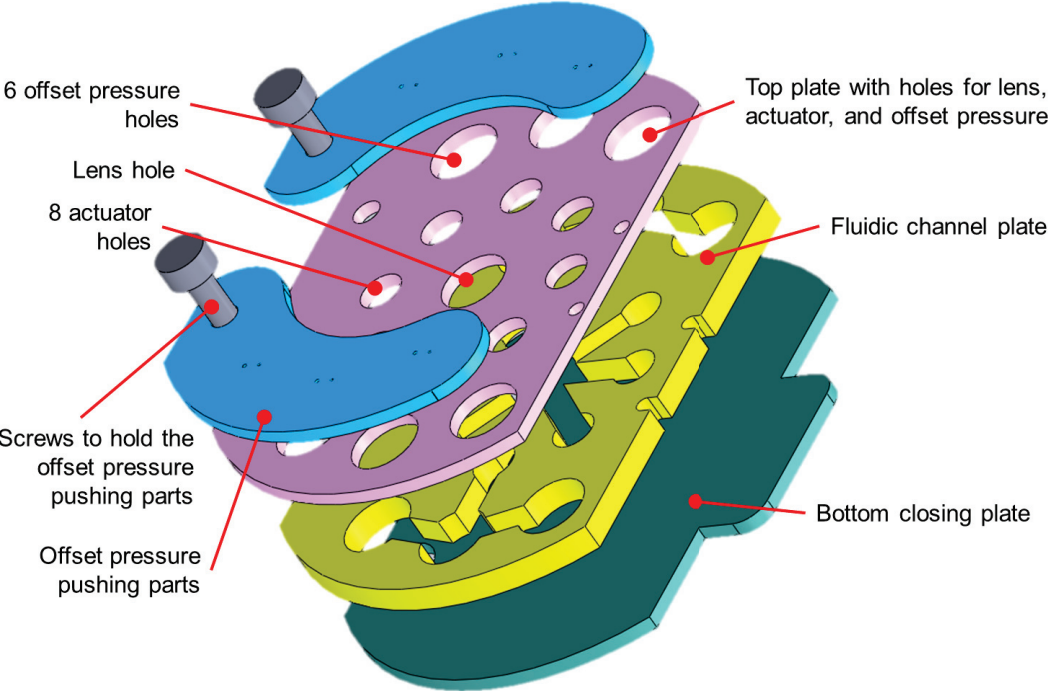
The body of the tunable lens is composed of 3 laser-cut PMMA plates assembled together with a silicone glue film, and of 2 PMMA removable offset pushing parts held by screws. The PDMS membrane is glued on top of the top plate.
